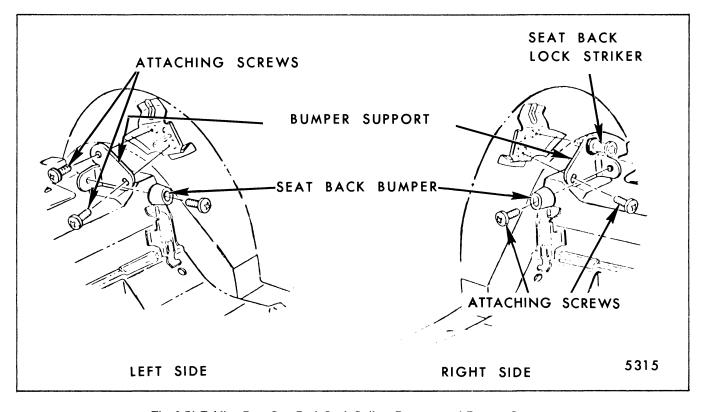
Folding Rear Seat Back Lock Striker, Bumpers and Bumper Supports
